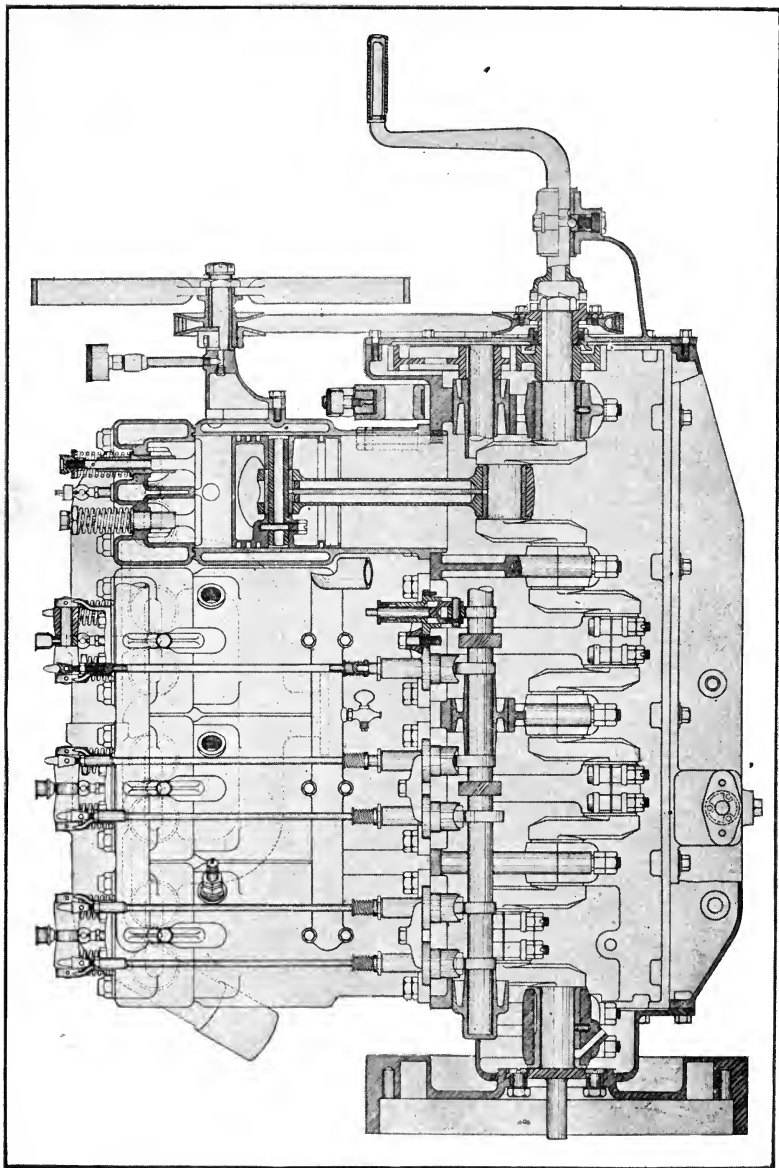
Sectional View Knox Model R Motor, Illustrating Application of Individual Cylinder Castings, Separable Head Members and Five-I-eared Crank Shaft. A Simple and Substantial Design that is Enduring and Efficient.
